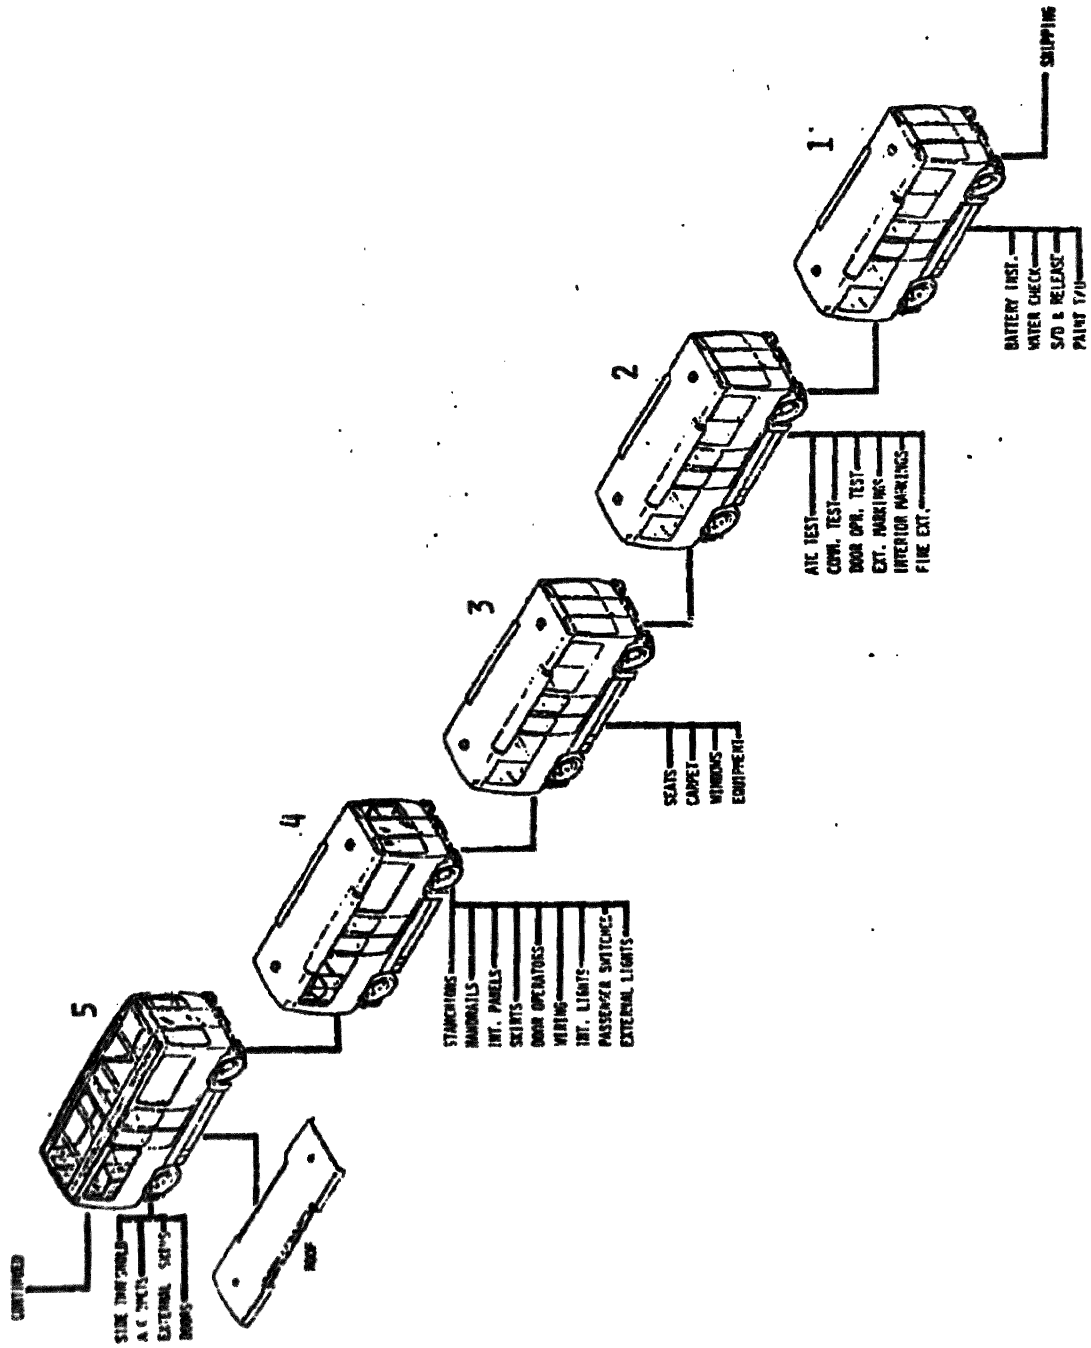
P40 PROTOTYPE VEHICLE ASSEMBLY
